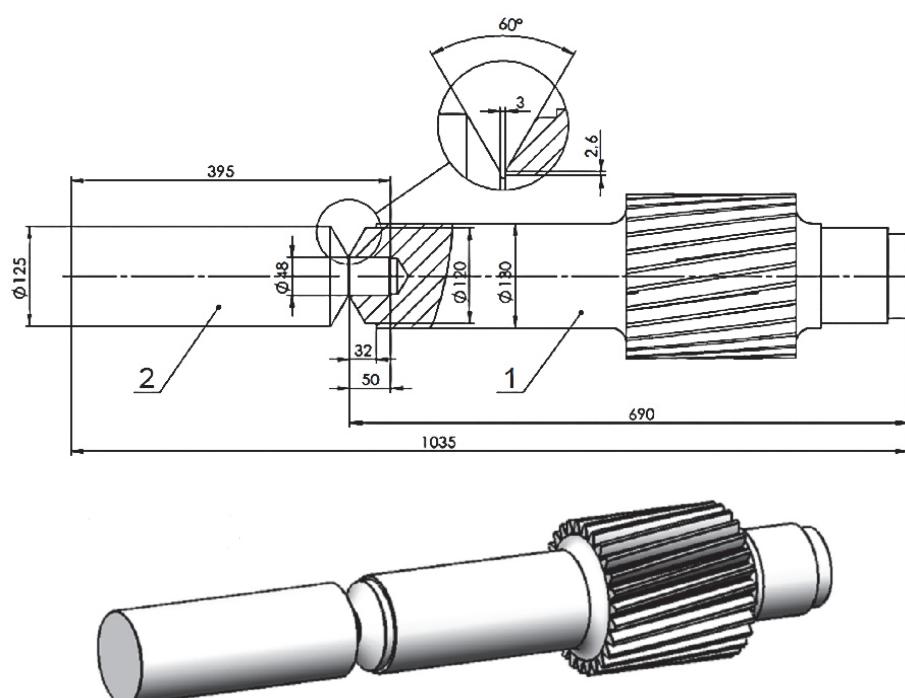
The “V” groove: 1) denotes the base part of the shaft 2) denotes the “attachment” that needs to be welded
